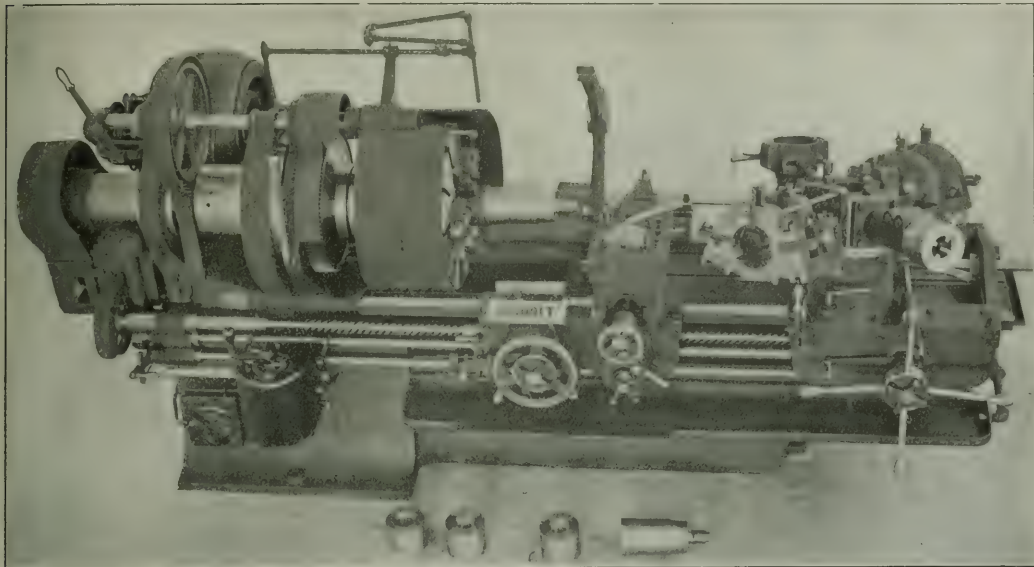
Gisholt 24-in. Lathe with  $\frac{6}{16}$  in. Hole.
